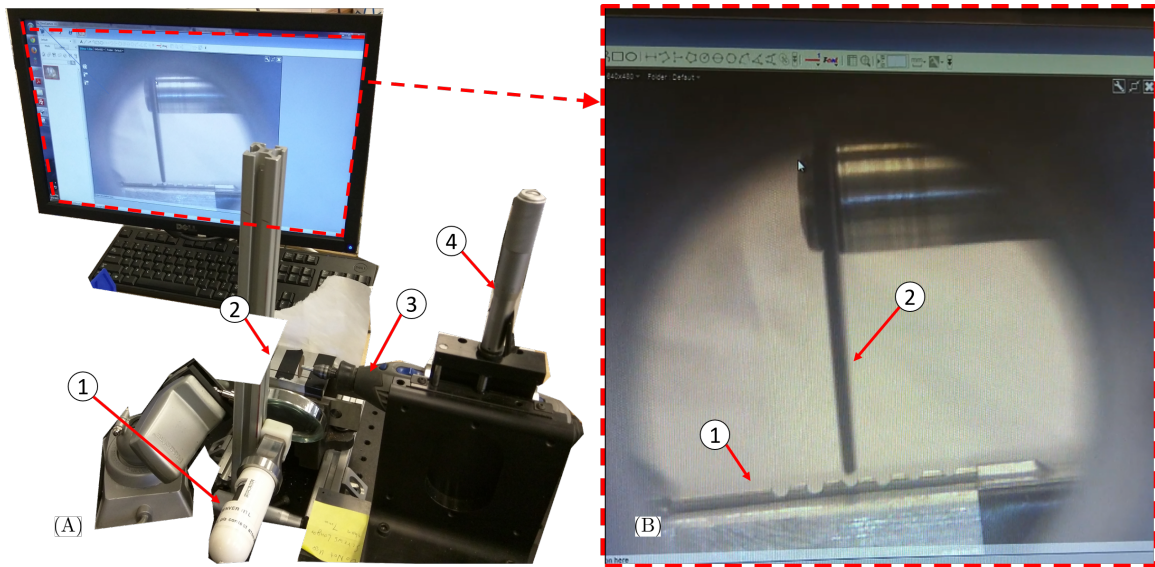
Fabrication setup for first Microsnake prototype: A.① Dynolight camera ② Tube holder ③ Dremel ④ Parker XYZ micro-meter cartesian stage - B.① Nitinol tube ② Diamond disk cutter
